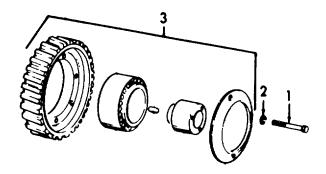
Gear Train Idler Gear, Removal/Installation.
